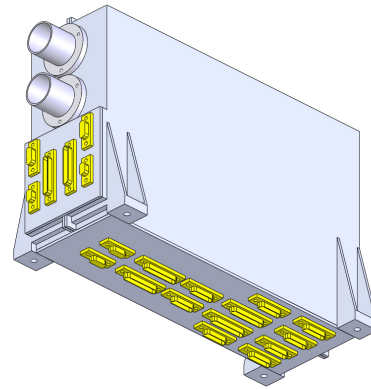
View of the preliminary enclosure design (detailing of connector plates and seals not full performed)
